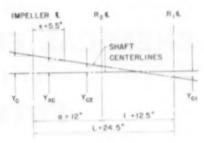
Displacement of shaft centerline by deformation in the bearings.
